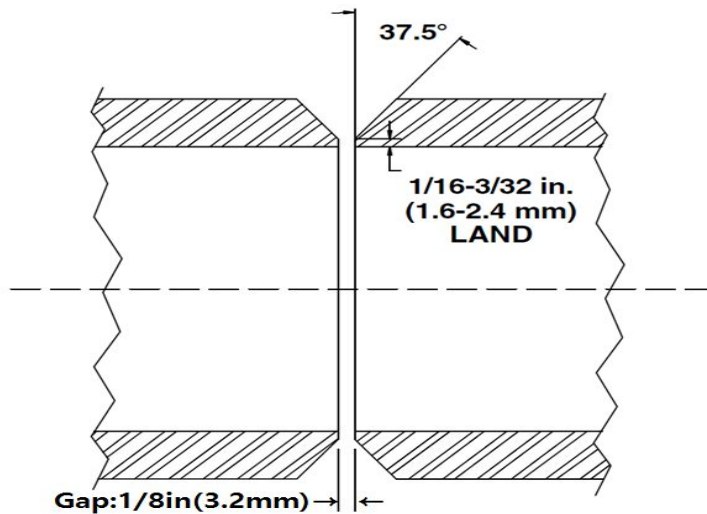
Dimensions of welded specimen and configuration of SS400 Pipe
